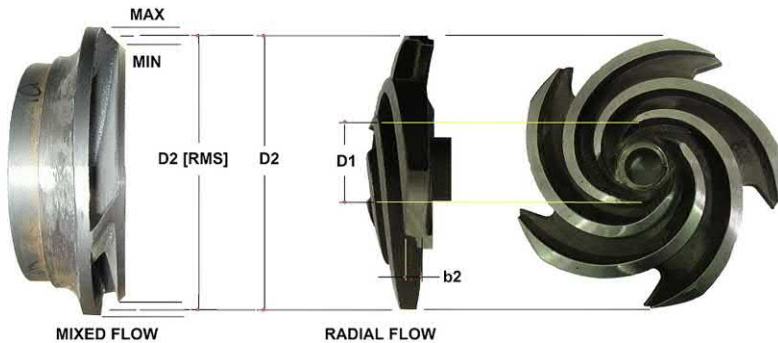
Key hydraulic dimensions of a centrifugal pump impeller.
